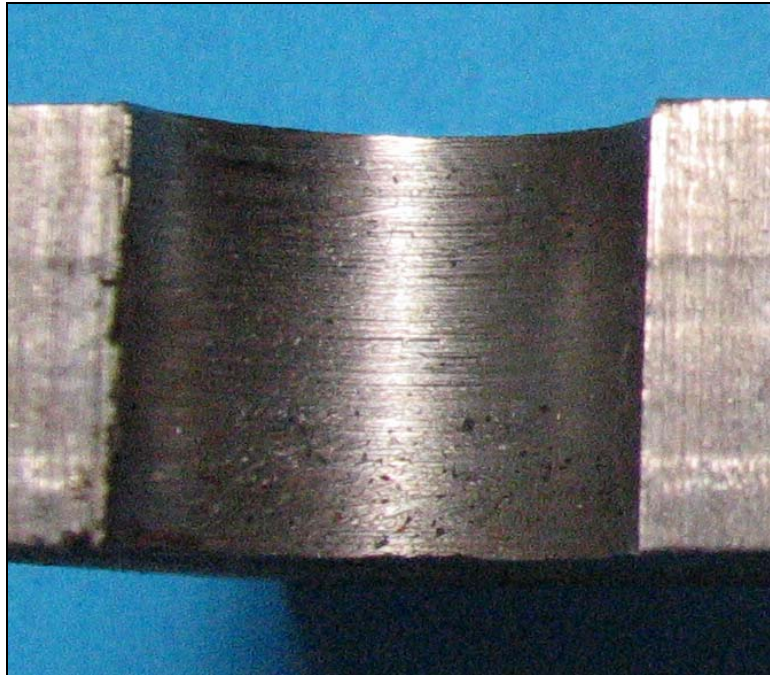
Close-Up of Cross-Section of Typical Drilled Hole Specimen (15/16 Inch Diameter Hole in 3/4 Inch Thickness Grade 50 Plate)
